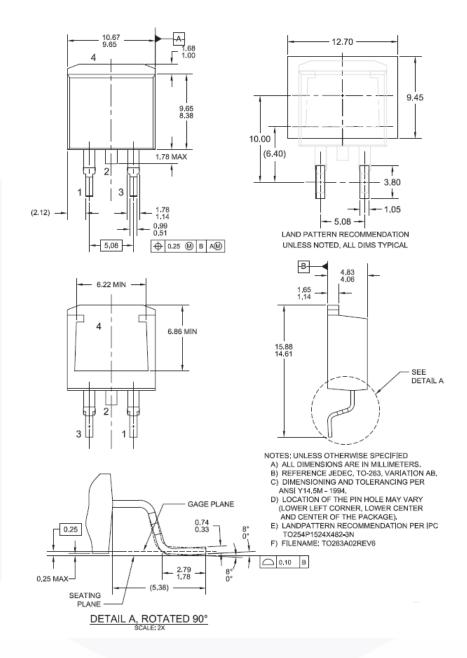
TO263 (D<sup>2</sup>PAK), Molded, 2-Lead, Surface Mount
